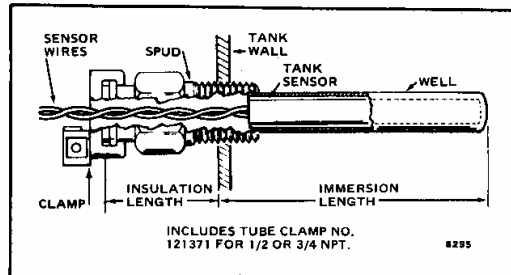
TANK SENSOR INSERTED IN IMMERSION WELL.
